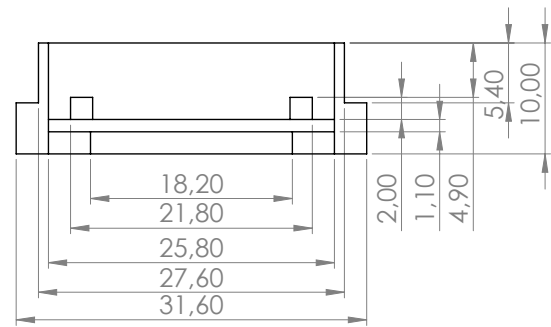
Magnetometer holder main body, front view. Dimension of 2 mm indent not visible.
